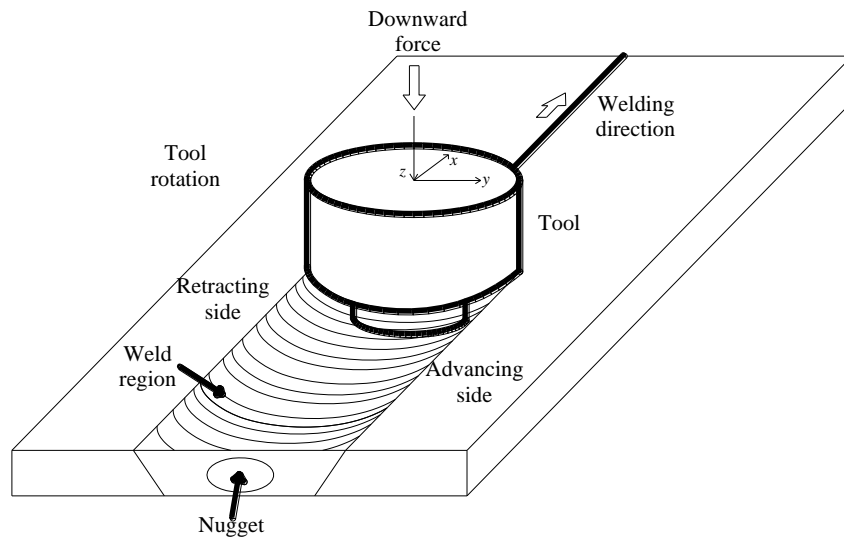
1. Schematic of the friction stir welding process
